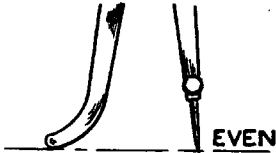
ADJUSTING SCRIBER LEG WITH CALIPER REVERSED
